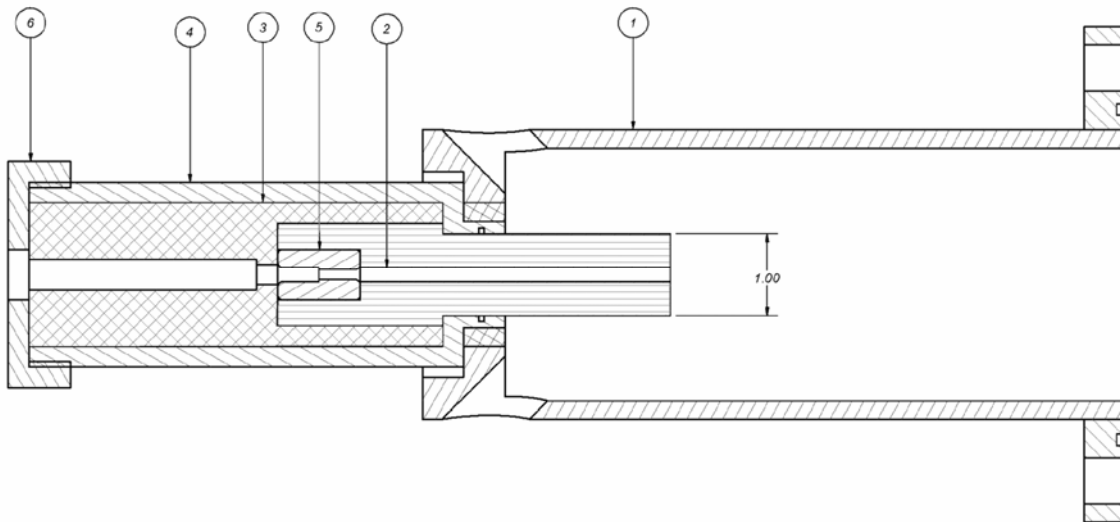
TPI Electrode Holder and Insulator Design Installed in Ignition Section
